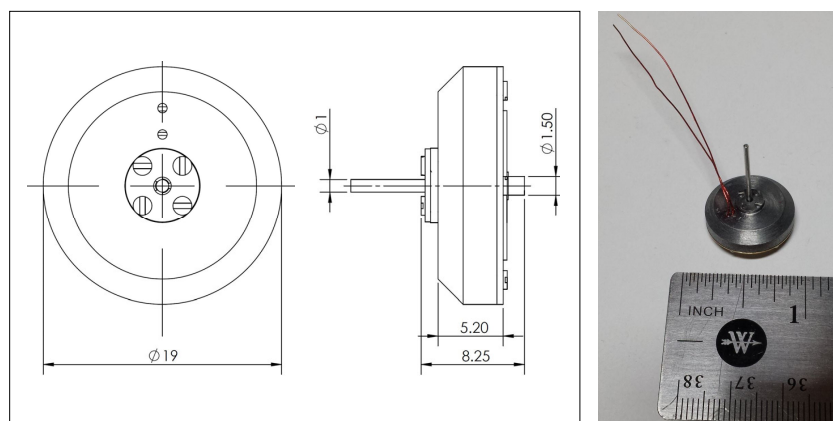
An assembled prototype of the "Planetary" MR clutch and its basic dimensions.
